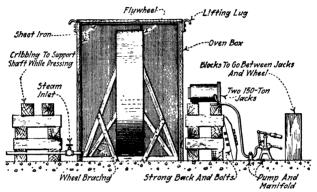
Arrangement for heating rotor in vertical position before pushing shaft into place.
